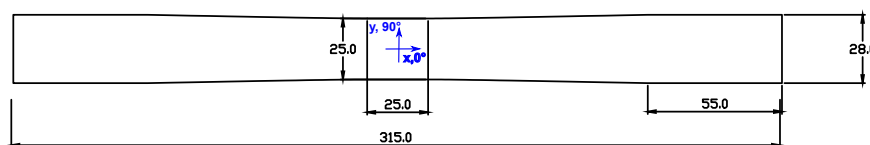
Specimen geometry for the quasi-static tensile tests. Dimensions are given in millimeters.
